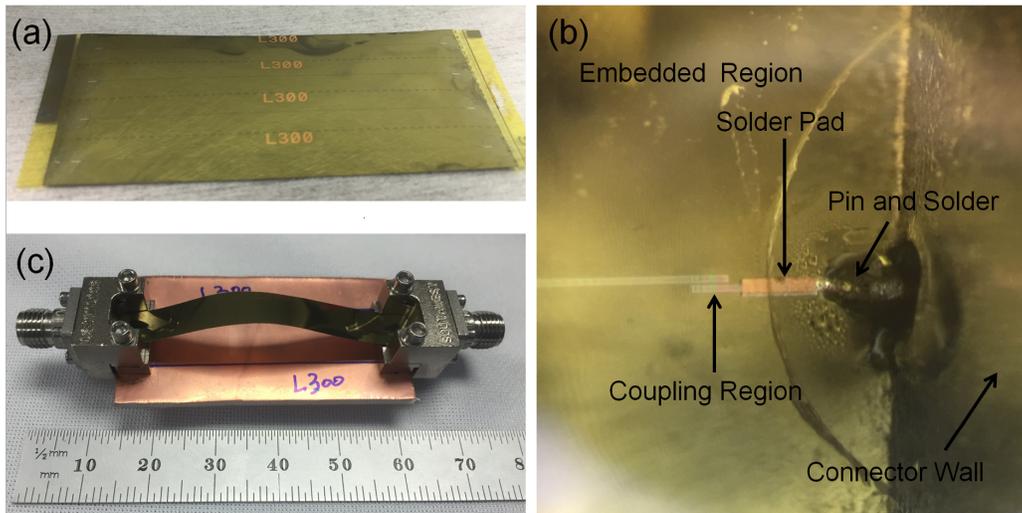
(a) Embedded Nb resonators before dicing and assembly. (b) Detailed image of pin and solder area, the opening defined by the Kapton dots can be seen as the arcing line in the image. (c) Assembled embedded sample with edge launch SMA connectors mounted onto a support board.
